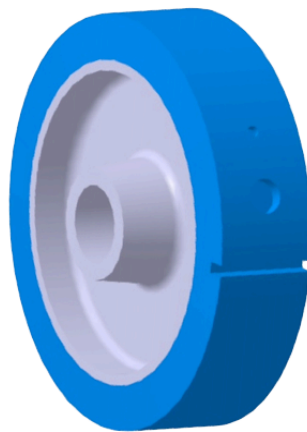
Drawing of a solid rubber tyre with examples of tread cut into the smooth surface
